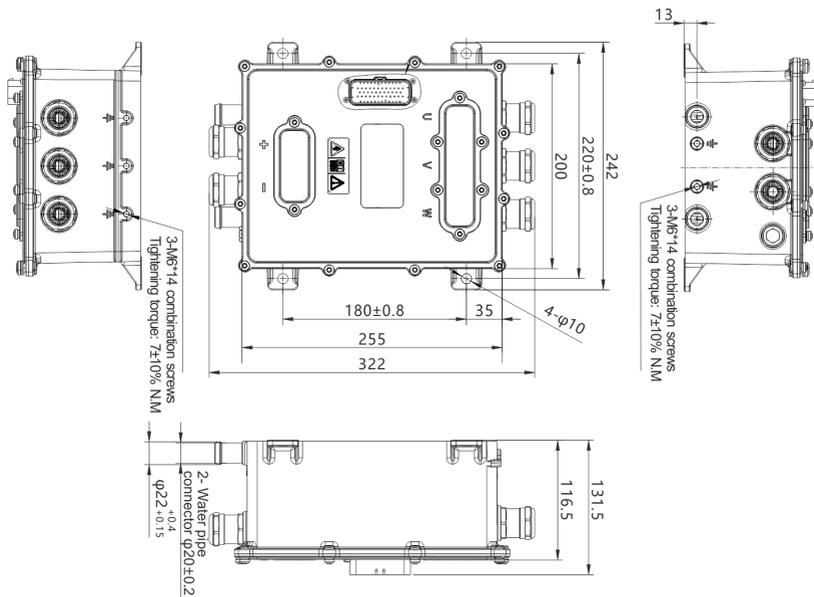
Outline, mounting dimensions of L640 (water cooling)
